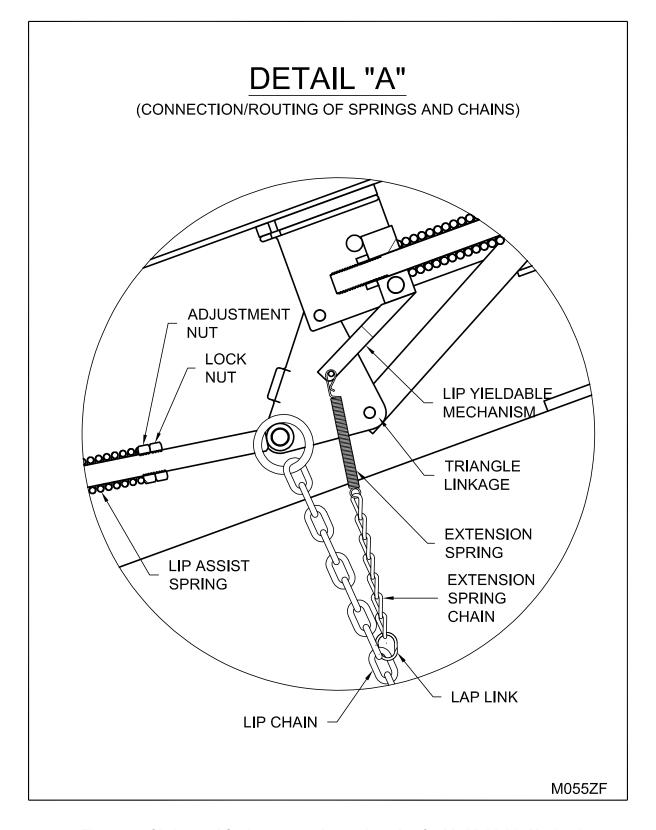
Chains and Spring connection and routing for Lip Yieldable Mechanism
